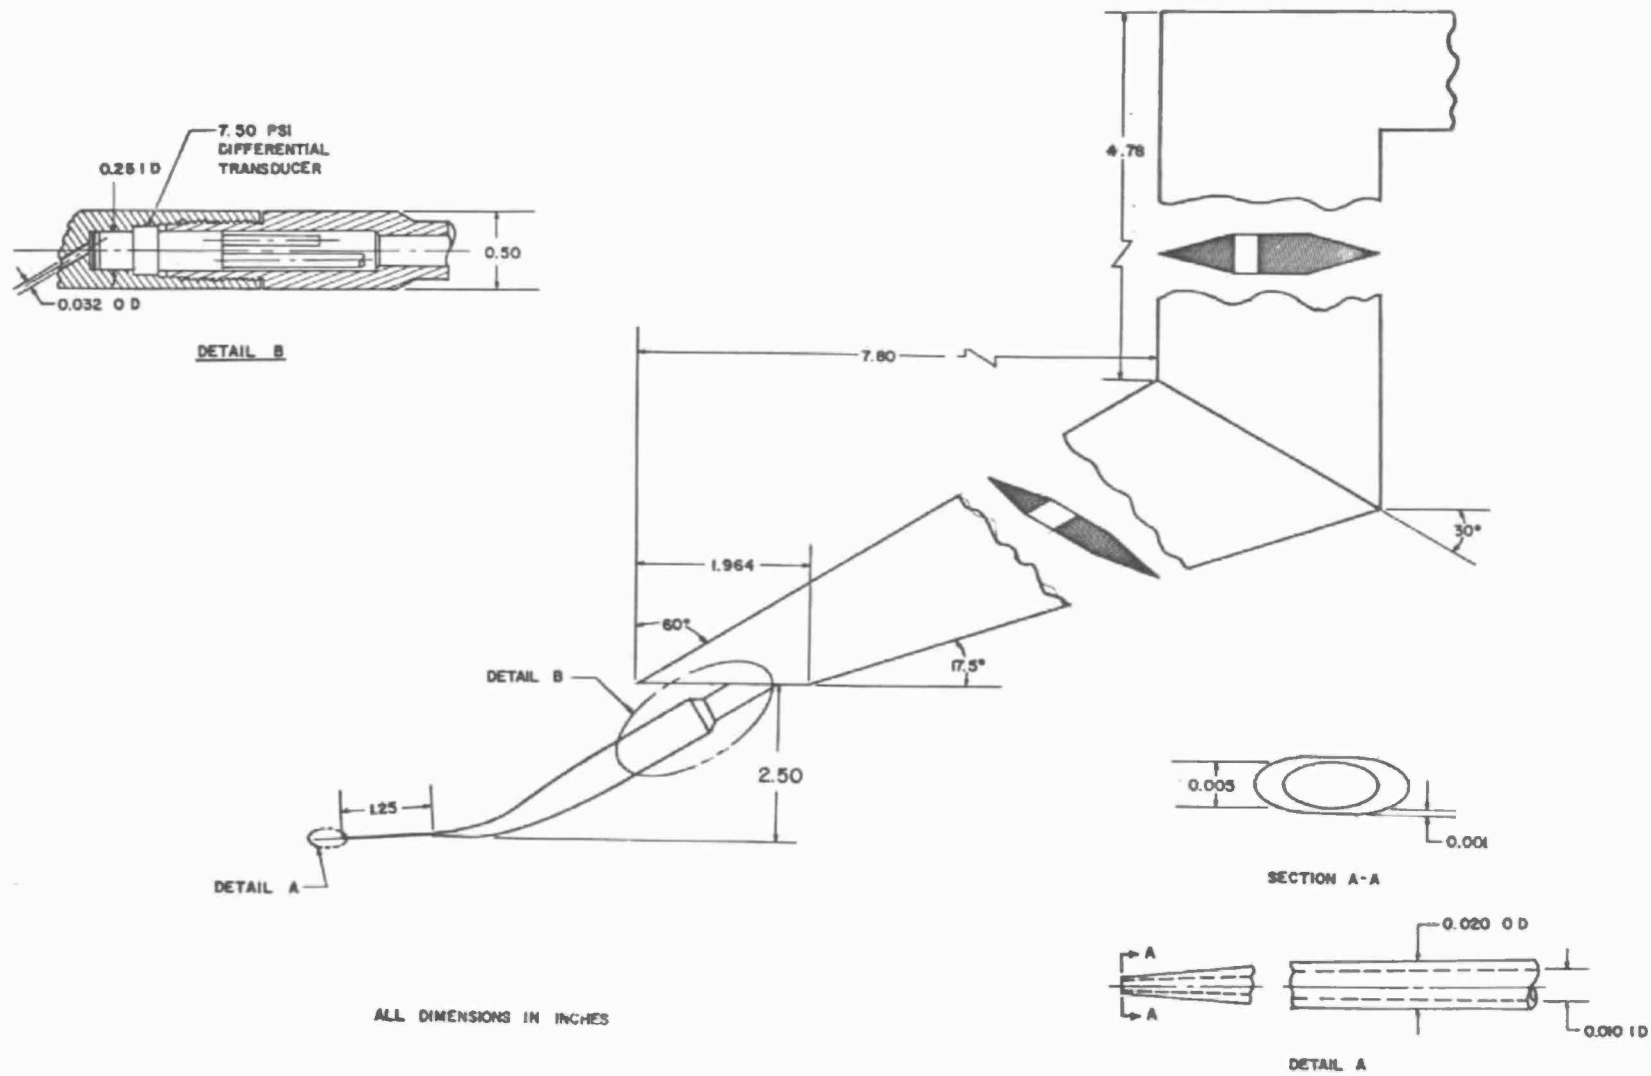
Details of Traversing Pitot Probe (and Strut) and Probe Pressure Transducer Installation
